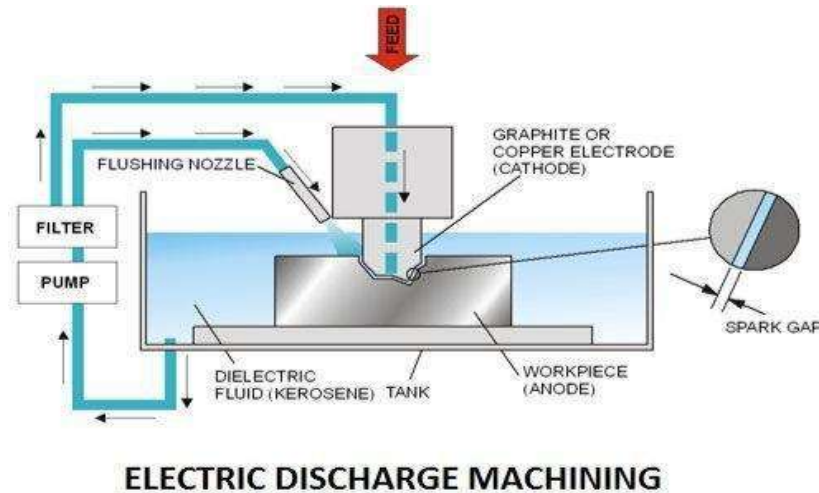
ELECTRO-DISCHARGE MACHINE SETUP
